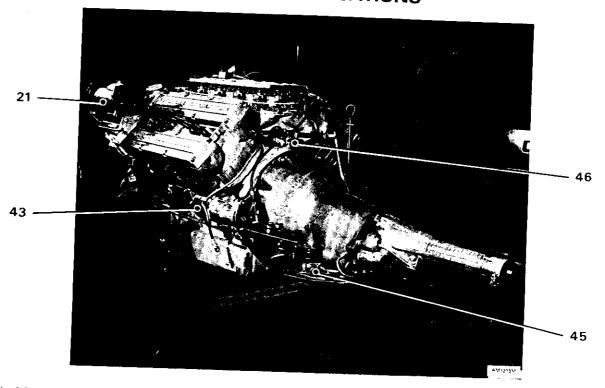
Engine and Gearbox – L.H. Rear View (Before Installation into Car)
